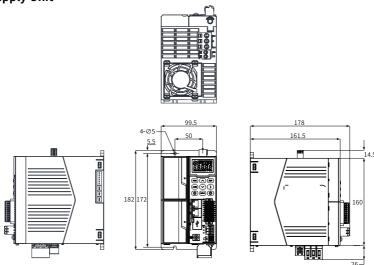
Overall and mounting dimensions of the power supply unit (unit: mm)
